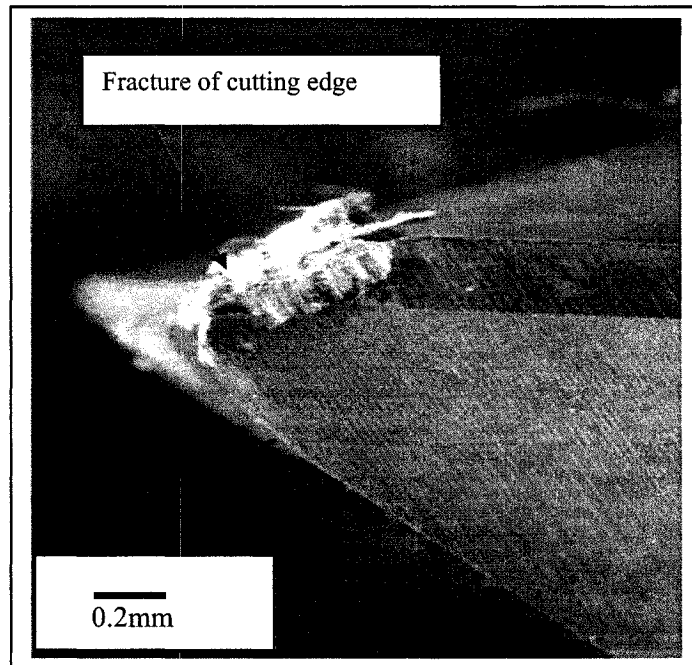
Wear surface, cutting speed= 50 m/min (836 rpm), depth of cut = 2.2 mm, feed = 0.025 mm/tooth, unstable(chatter)
